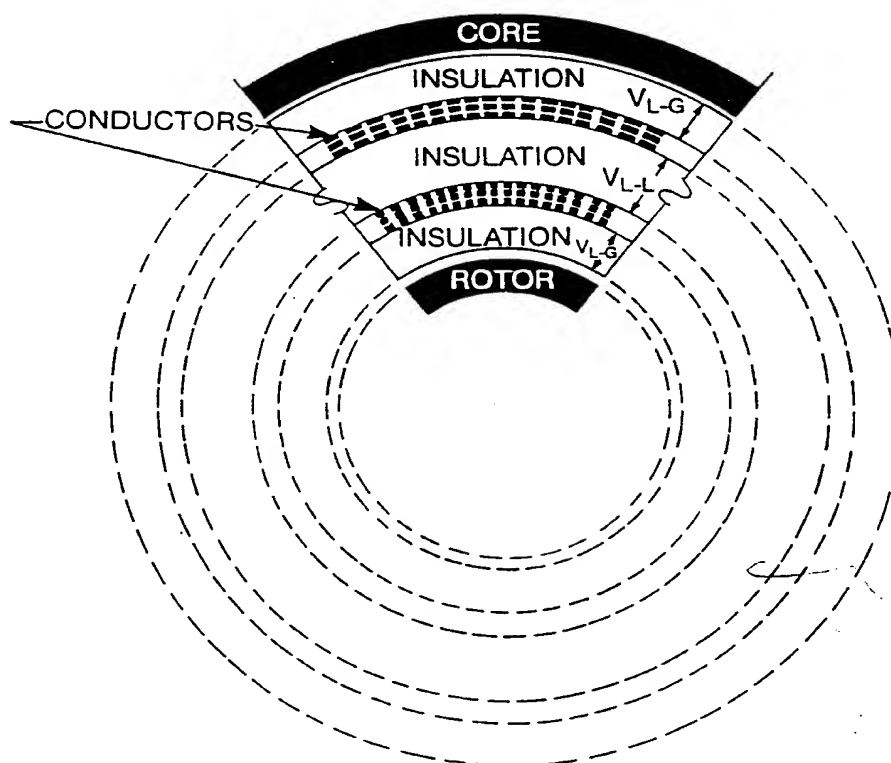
Cross-Section of a Monolith Cylinder Armature
